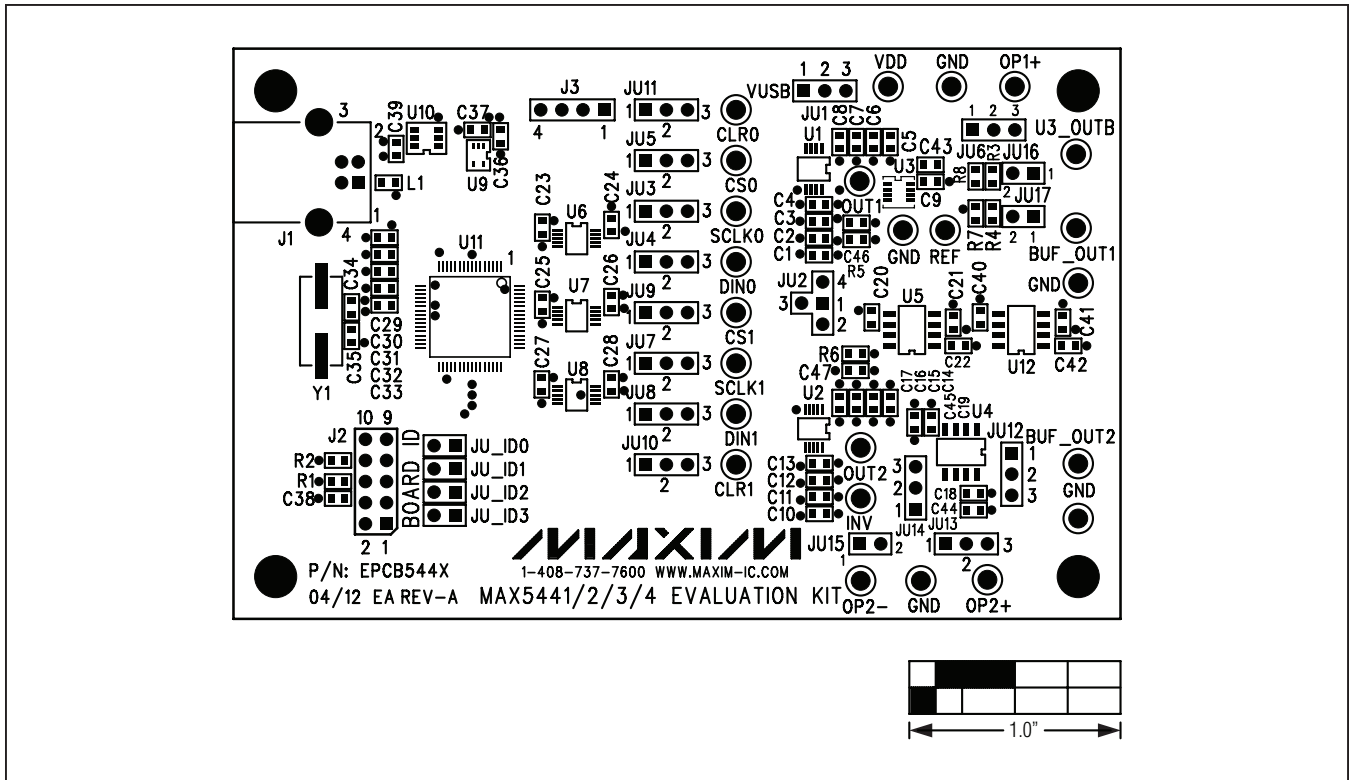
MAX544X EV Kit Component Placement Guide—Component Side
